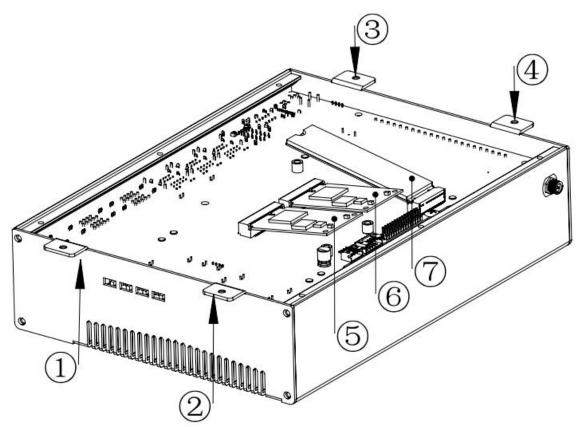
1 TPC6000-XXX4 miniPCIE expension card installation
